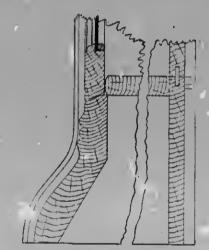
Enlarged Section through Lower Part of Sectional Bookcase.
